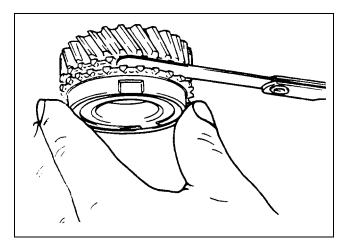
G-15. Synchronizer Ring-to-Gear Clearance
